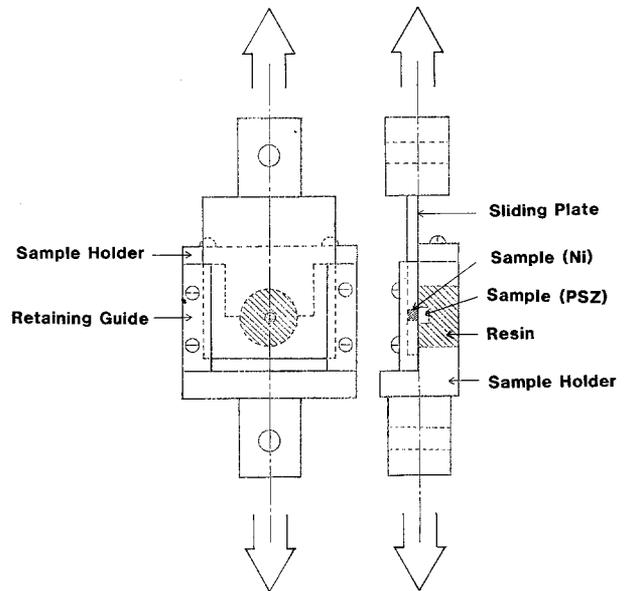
Schematic drawing of stainless steel implements of the shear test.
